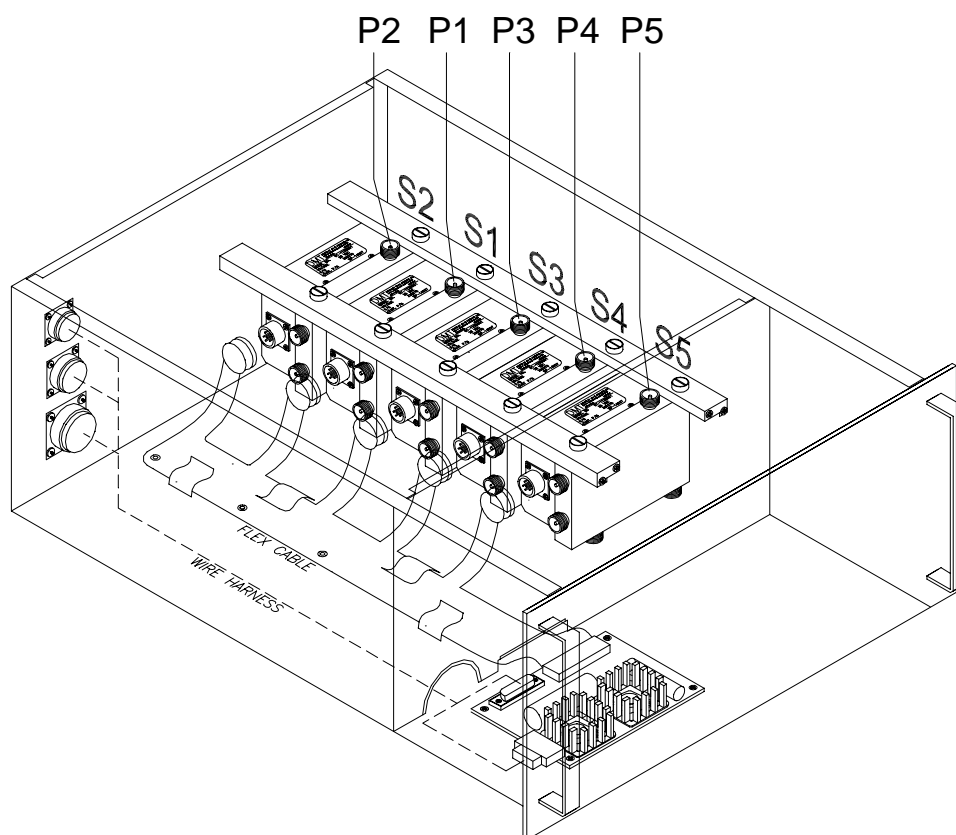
Type 2 BSU Switch Assembly Internal Component Layout
